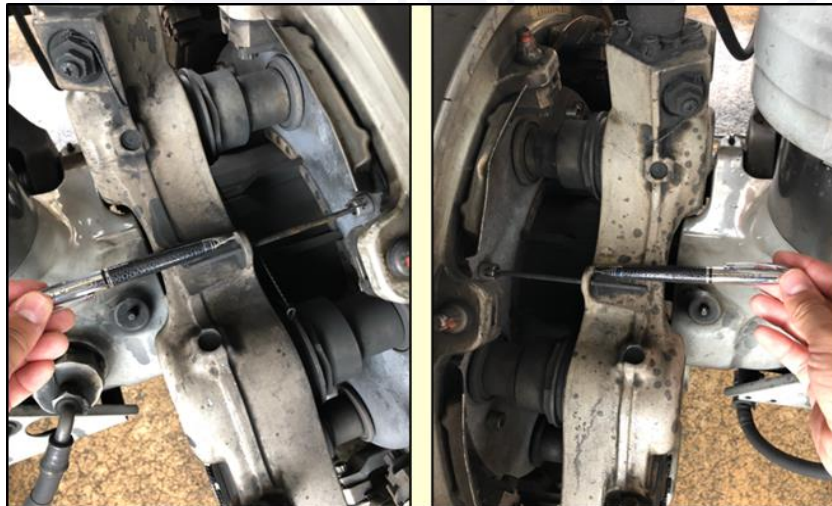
Brake assembly of the left main landing gear (internal and external).
